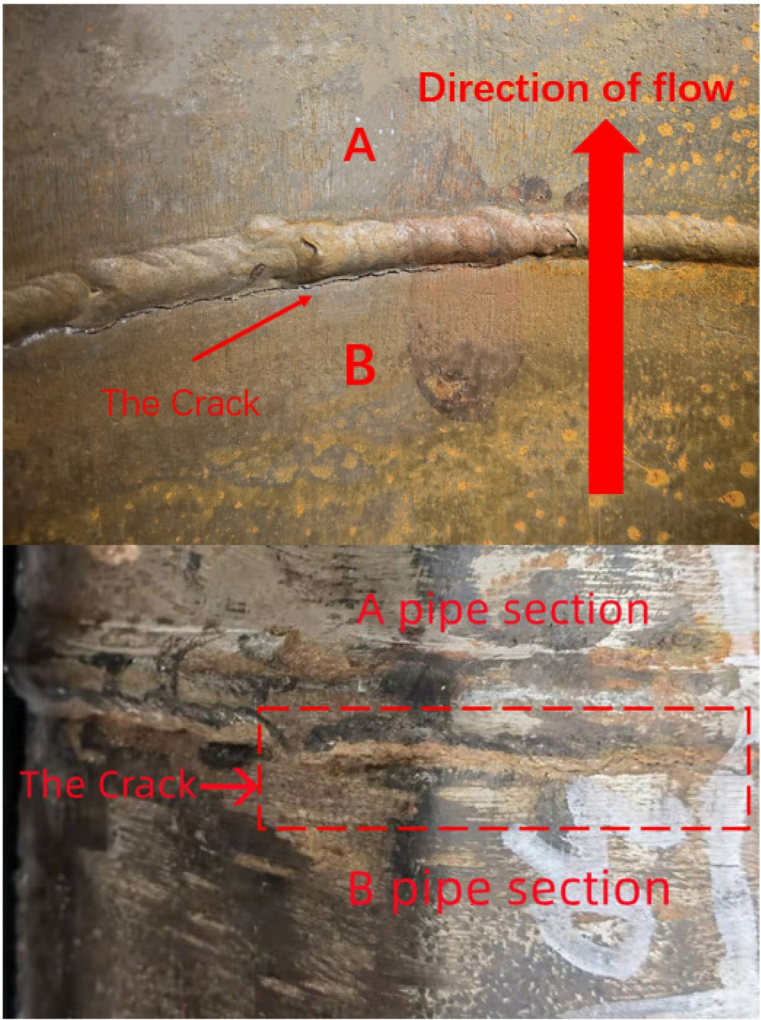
Macroscopic appearance of pipeline weld position
